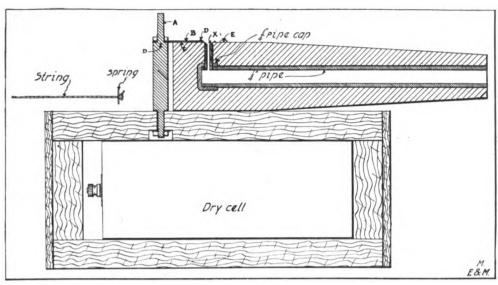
SIDE VIEW OF THE FINISHED CANNON, SHOWING THE METHOD OF MOUNTING AND THE BATTERY BOX
